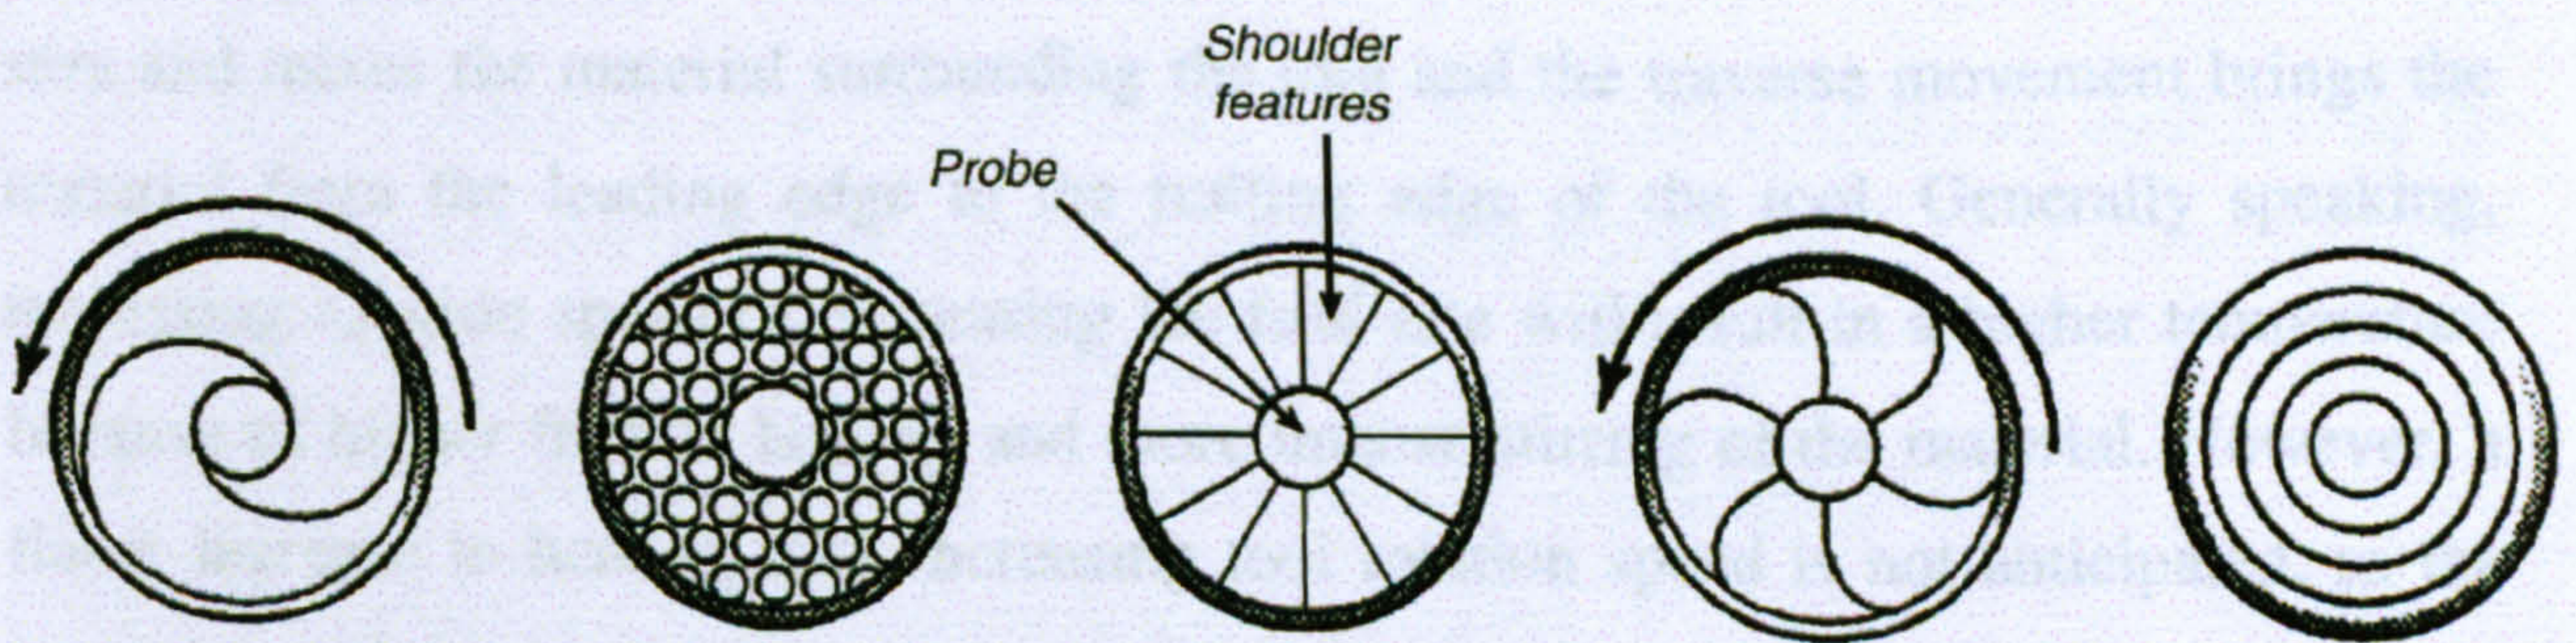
Tool shoulder geometries, viewed from underneath the shoulder [2.1]
